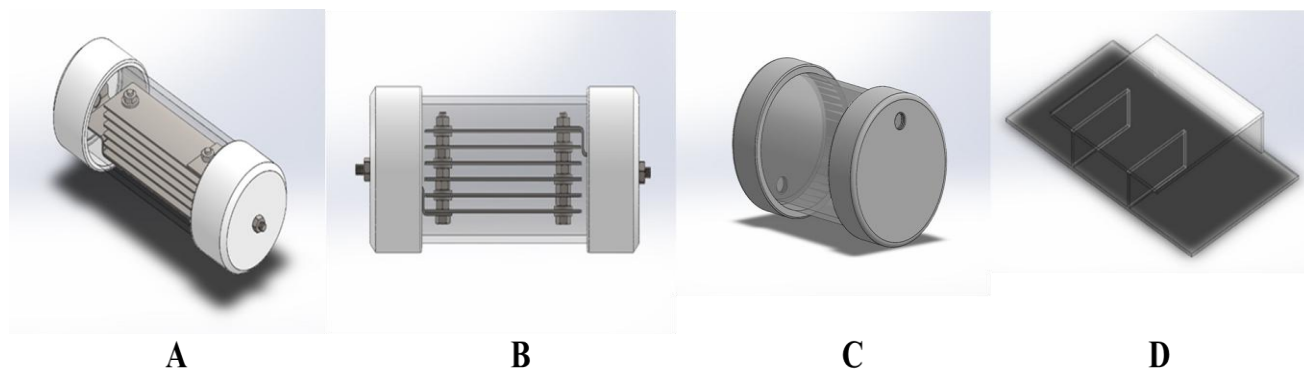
Isometric View of HHO Generator Unit (A), Front View of HHO Generator Unit (B), Front View of Bubbler Unit (C), Isometric View of Controller Unit Casing (D)
